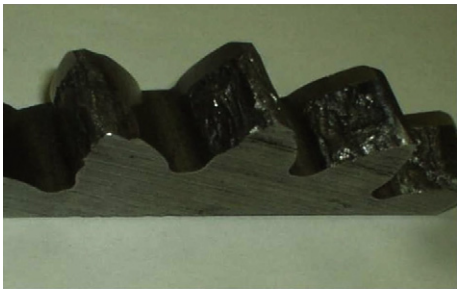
Case crushing of carburized part due to insufficient case depth and soft core.
